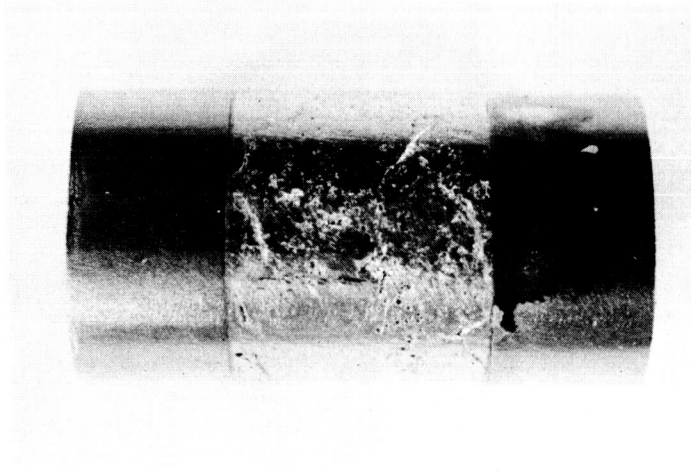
P-type element SnTe-brazed to W electrodes showing surface cracks X7.
